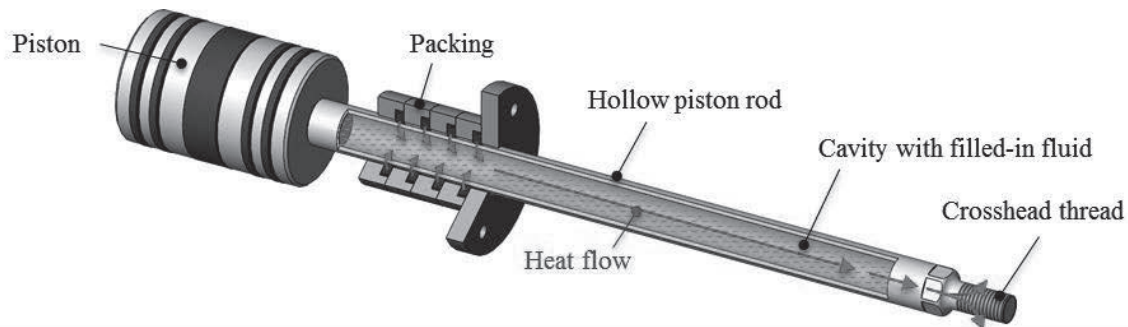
Design and principle of operation of the internal piston rod cooling concept
